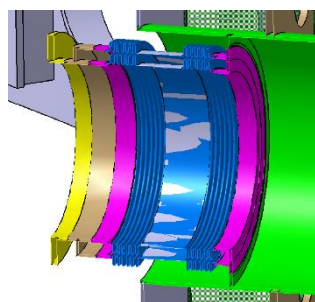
Bellow Flange Welding & NDE Configuration
